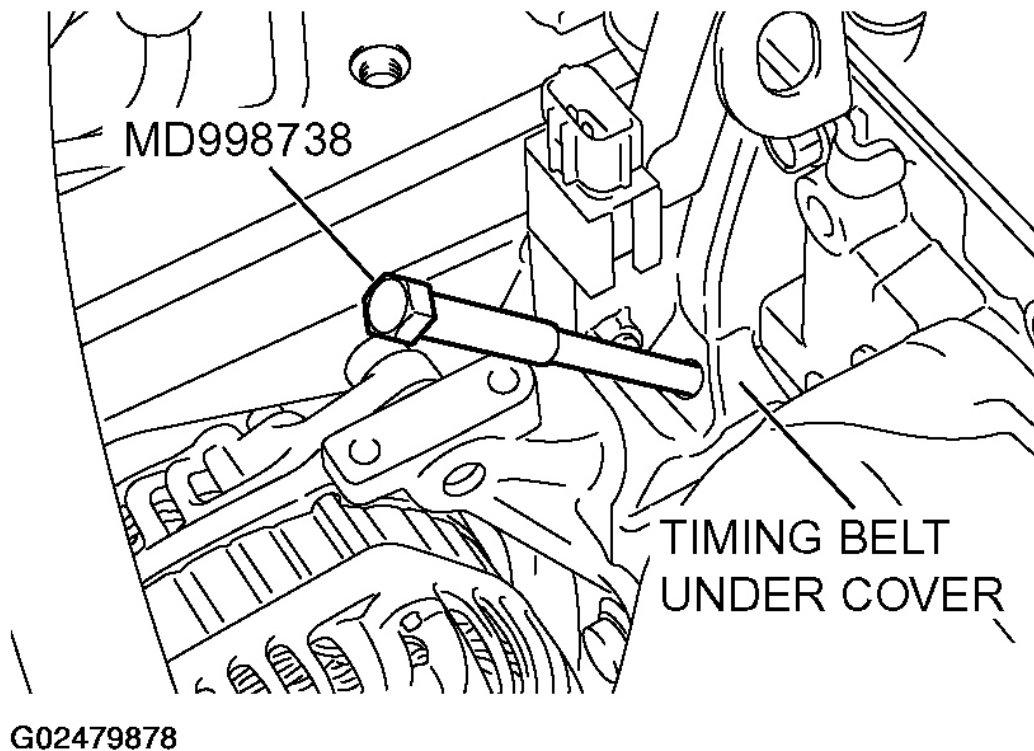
Removing Timing Belt Under Cover Rubber Plug
